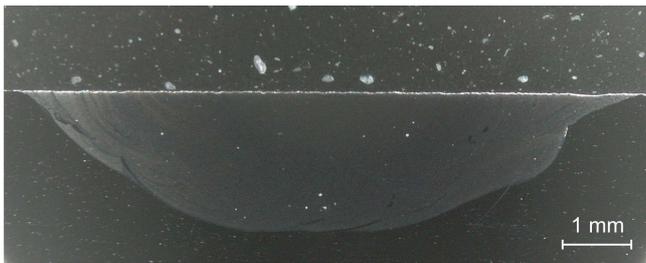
Overview image of a FeCrV15 cladding that has been produced by oscillating laser cladding head movement inside a groove with 45° edges after grinding
